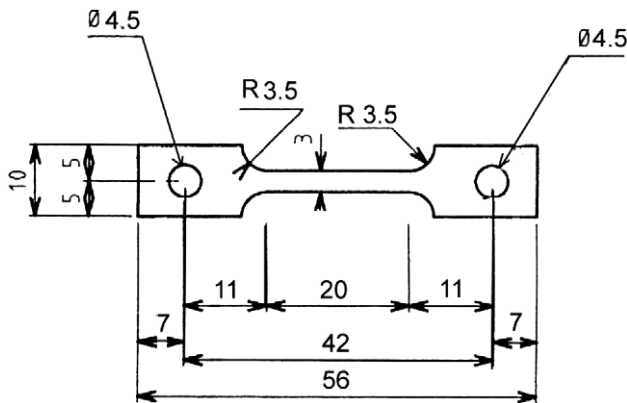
Tensile thin specimen (thickness = 0.3 mm).
